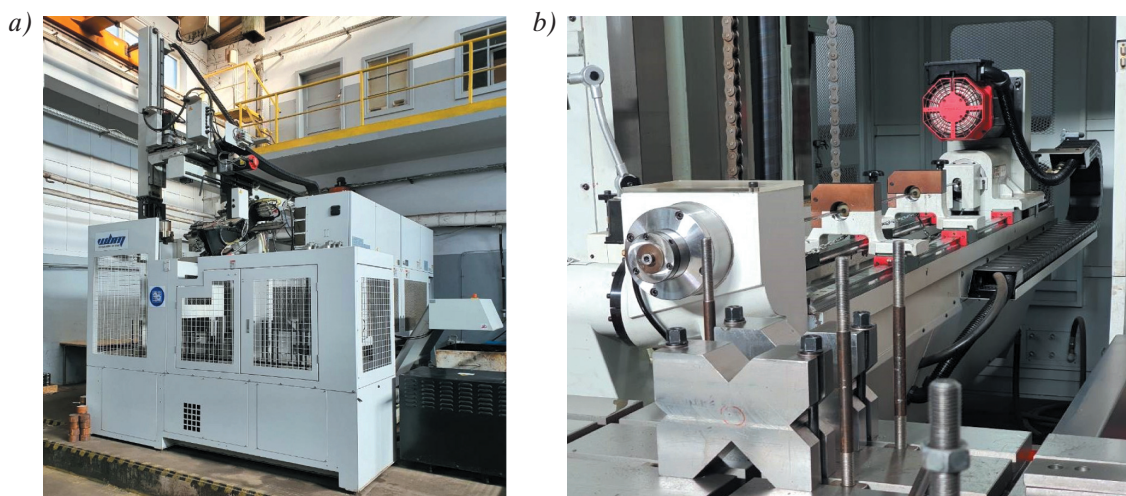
CNC machining center for machining (a); CNC machine for deep-hole drilling (b)
